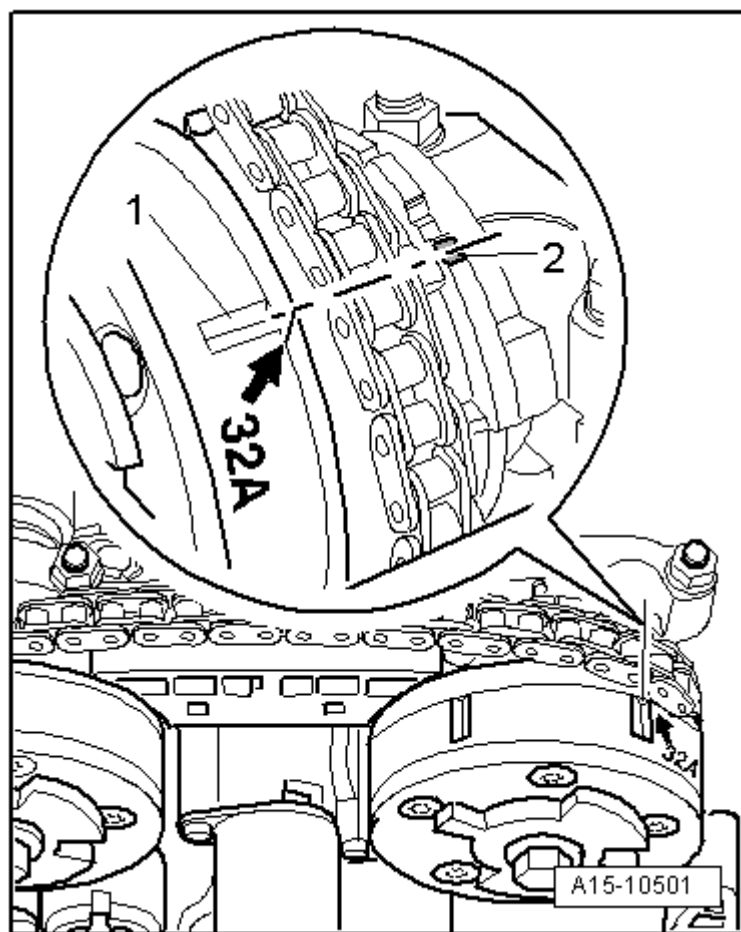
Verifying Installation Marks Of Exhaust Camshaft Adjuster With Marks On Control Housing
